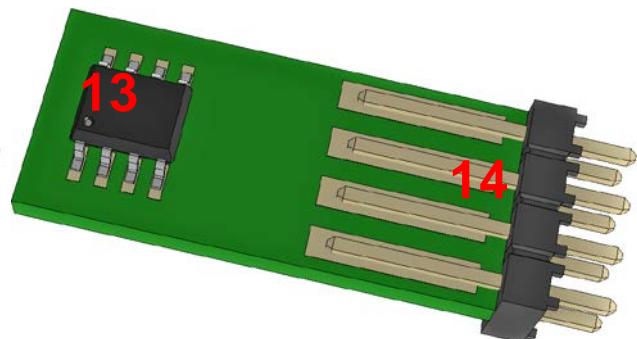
3Z side PCB assembly ("4-pole 180 DEG" face)
